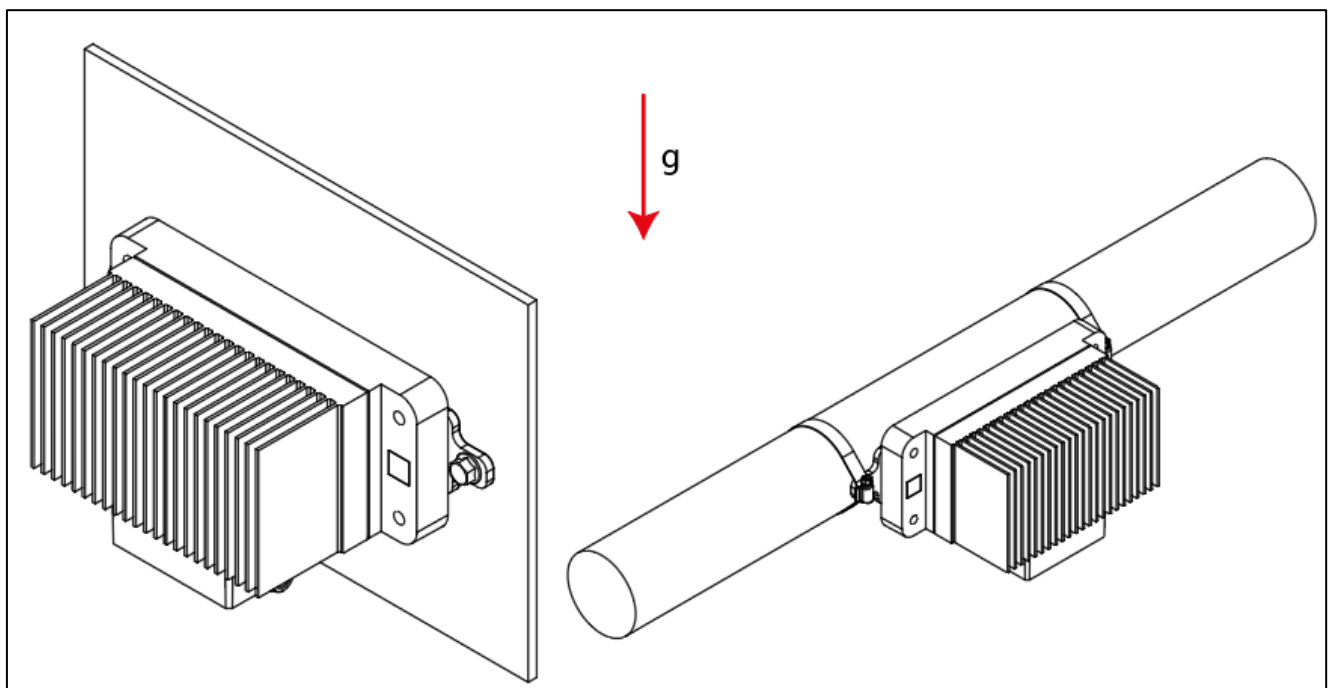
InduEye® TG Duo module mounting options with vertically positioned heat sink fins
